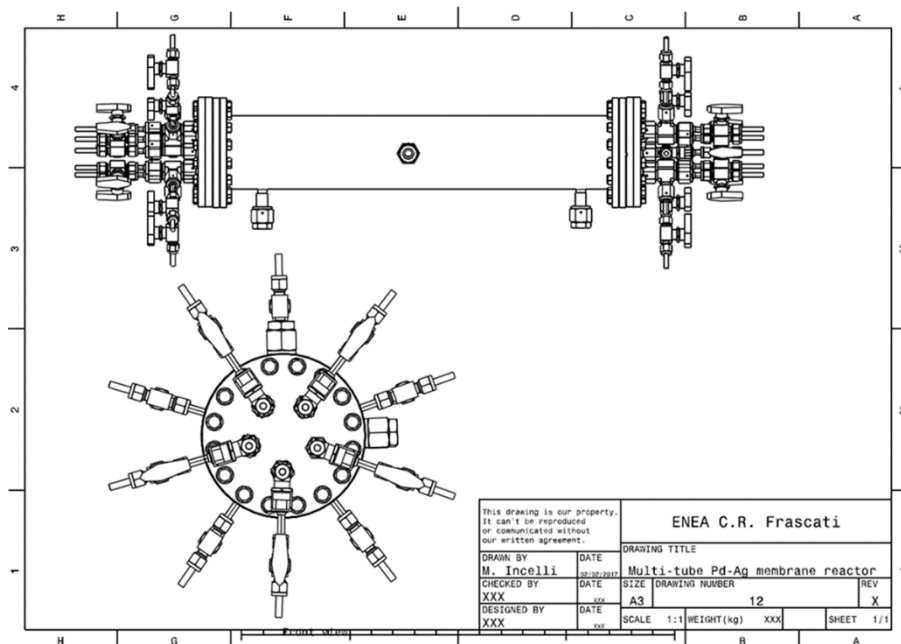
Technical drawing of the multi-tube membrane module: particular of one flange with the 5 Pd-Ag tubes.
